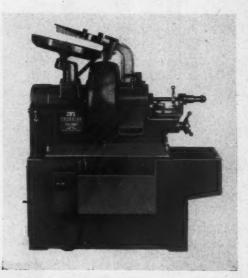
Following the pointing operation on the machine shown in Fig. 1, the wood screw threads are cold formed and completed automatically on this Crossley-Trurnit machine
